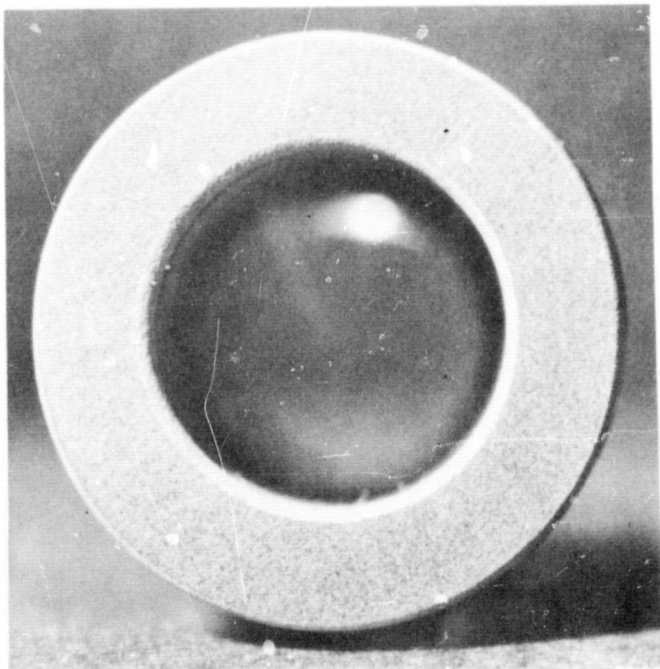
Condition of Hardface Seal Surface of Test Unit 4 Before Test (XP-90407)
